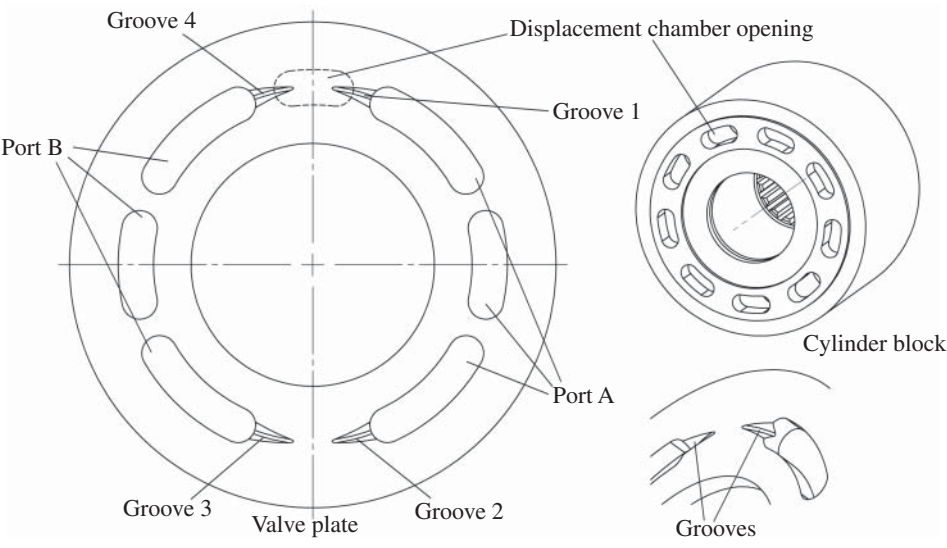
Valve plate geometry example for a bidirectional motor.
